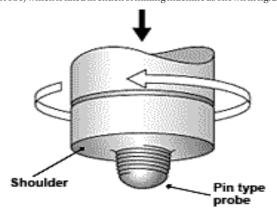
FRICTION STIR WELDING TOOL.
